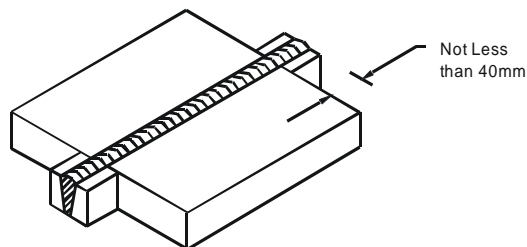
Butt weld with run-on and run-off pieces
